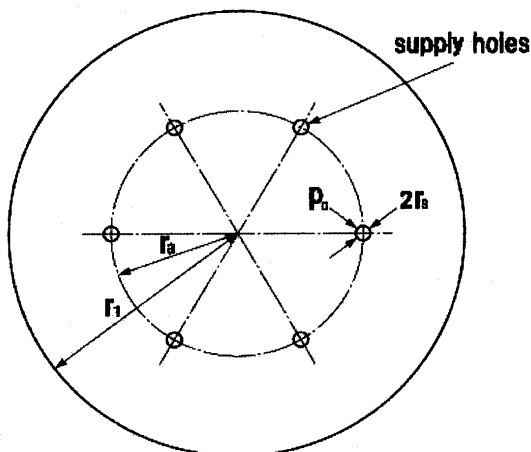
Schematic view of externally pressurized gas bearing with multiple supply holes
